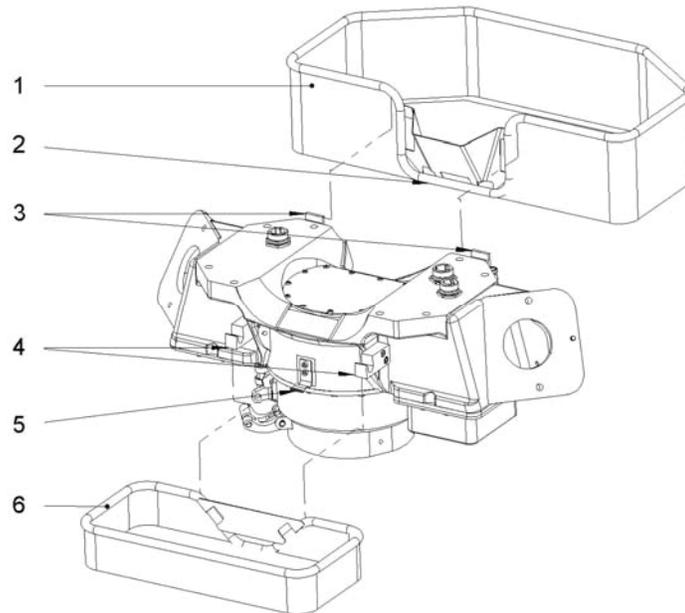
Front and Rear Casing Collector Bags, Installation.
